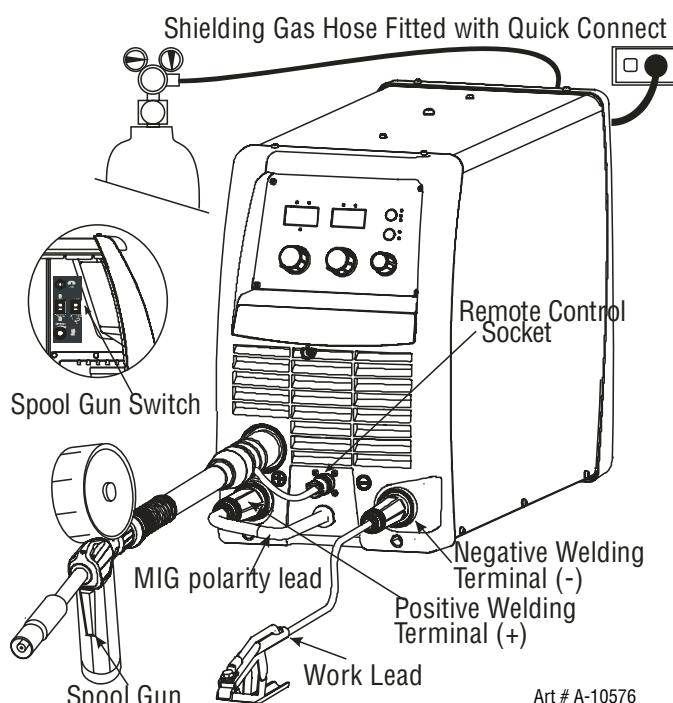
Setup for Spool Gun Welding with Gas Shielded MIG Wire
